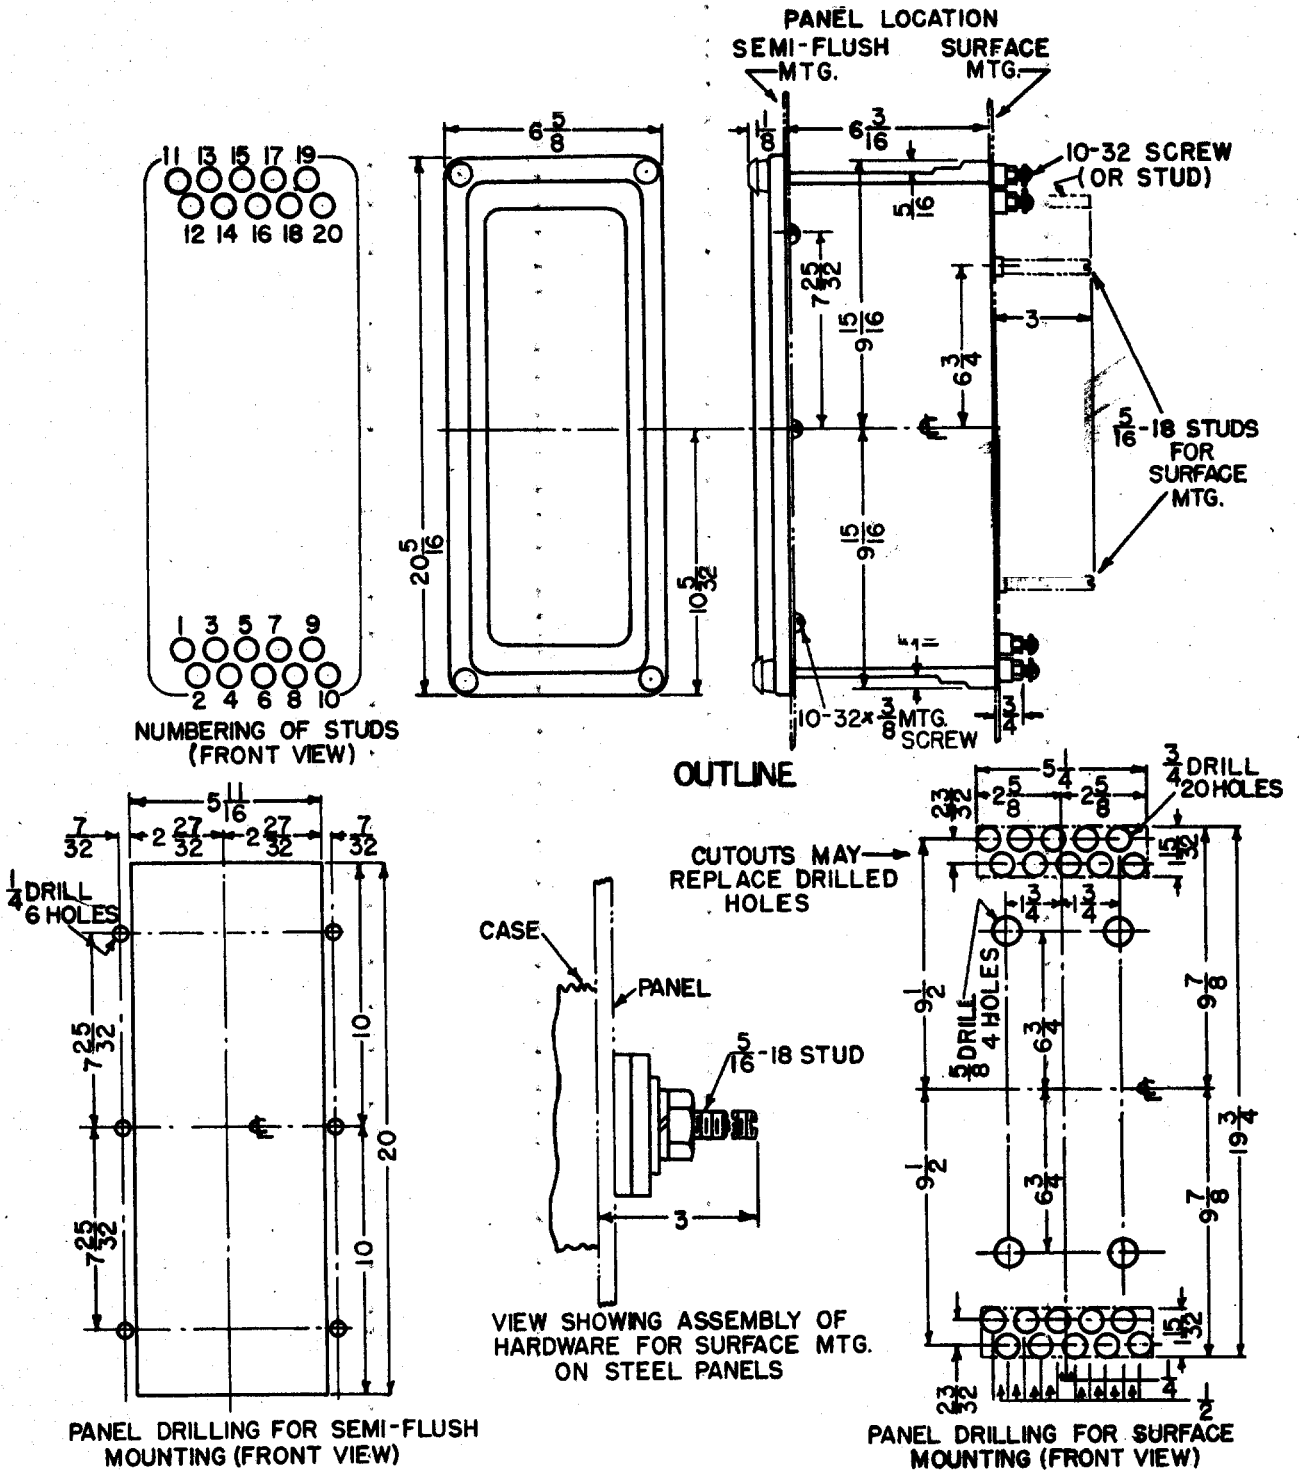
Outline and Panel Drilling Dimensions for Size L-2 Case
